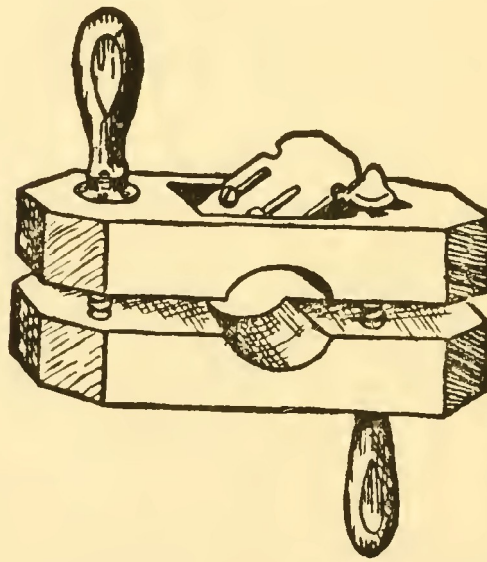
ANOTHER TYPE OF ROUNDING TOOL.
